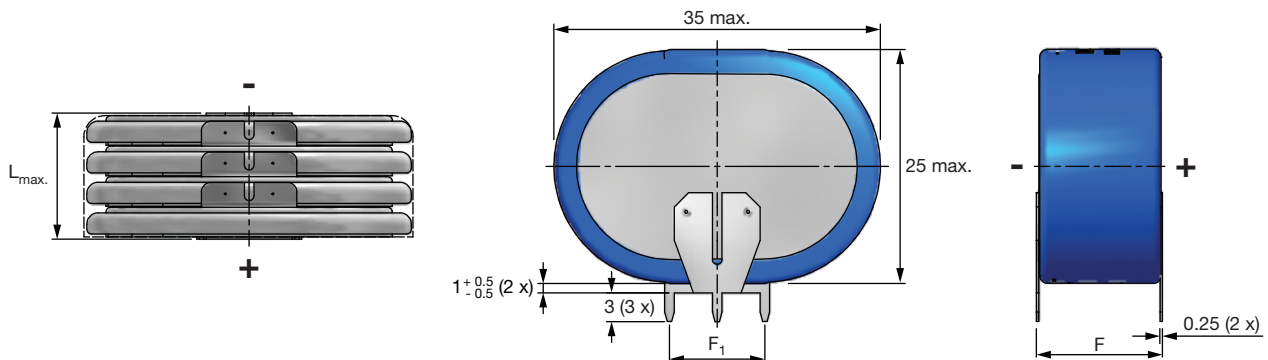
Form G: Stacked Through Hole Oval (PCBD)
